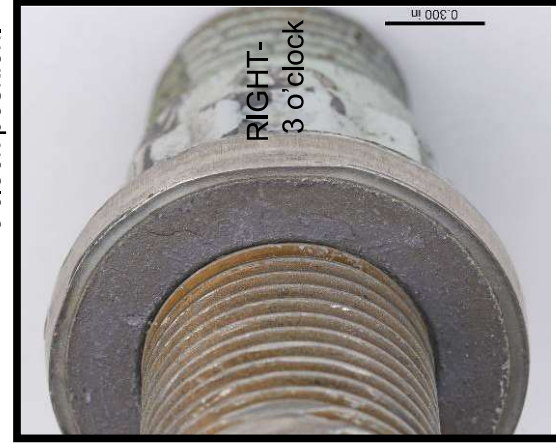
Detailed view of Tee Bolt Nut-3 o'clock position.
